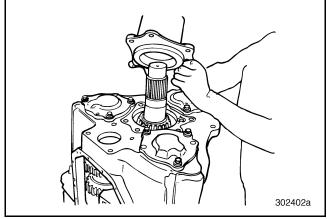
Installing Output Housing (T313L21/T318L21 Shown)
